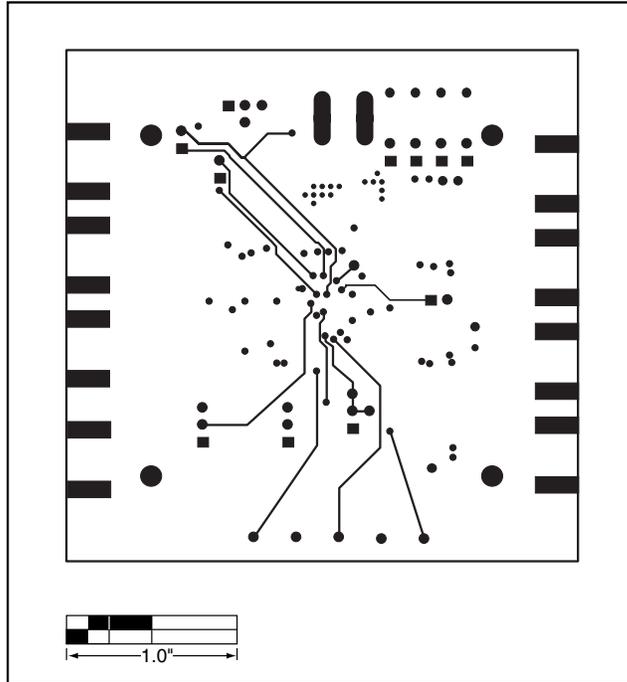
MAX3675/MAX3676 EV Kits PC Board Layout—Solder Side
